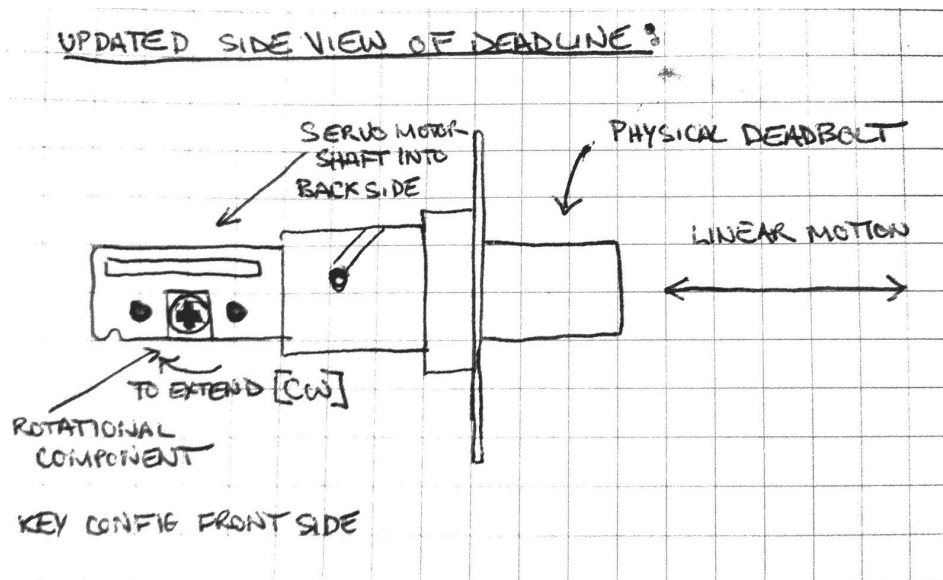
Sketch of mechanical deadbolt. The rotational component will be driven by a DC motor to automatically transition between the locked and unlocked states.
